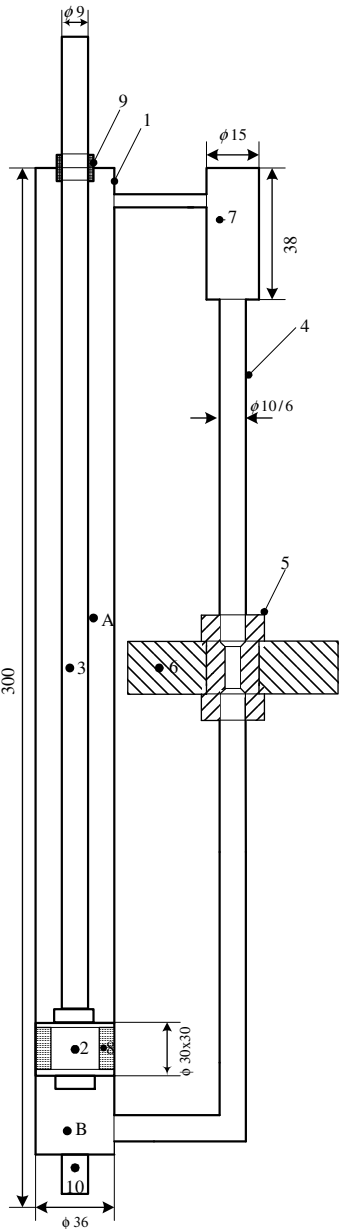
Semi-active damper with MRS (schematic diagram): 1 – cylinder, 2 – piston, 3 – spindle, 4 – external hydraulic circuit; 5 – nozzle, 6 – electromagnet, 7 – volume compensating chamber, 8 – tightening gasket, 9 – spindle tightening block, 10 – fixing screw – damper positioning, A and B – compartments.
